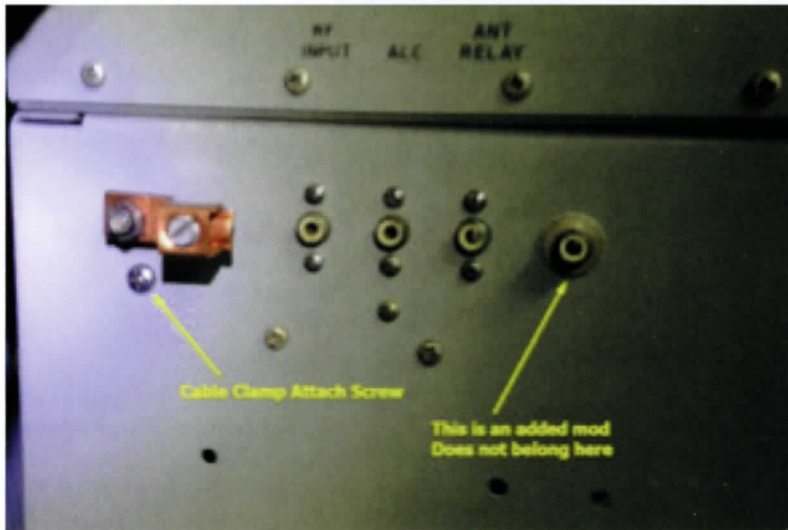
Rear Harness Cable Clamp & Attachment Nut
